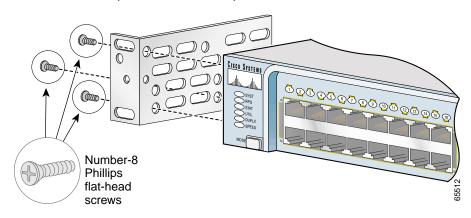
Attaching Brackets on the Catalyst 2950G-48-El Switch in a 19-Inch Rack (Rear Panel Forward)
